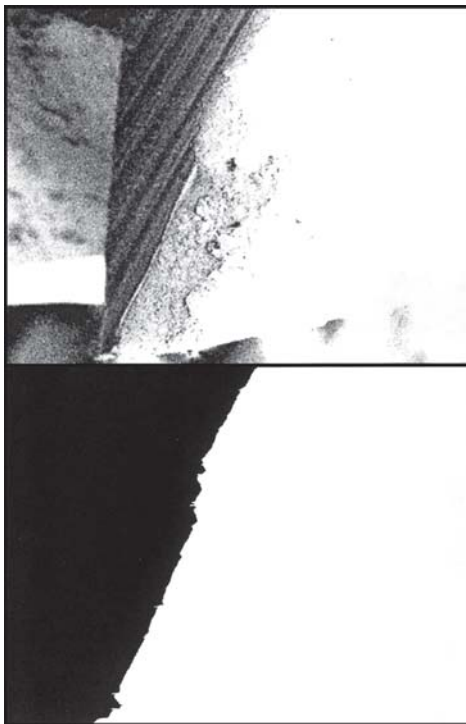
Worn 9.525 mm small milling cutter after 30 machining passes
